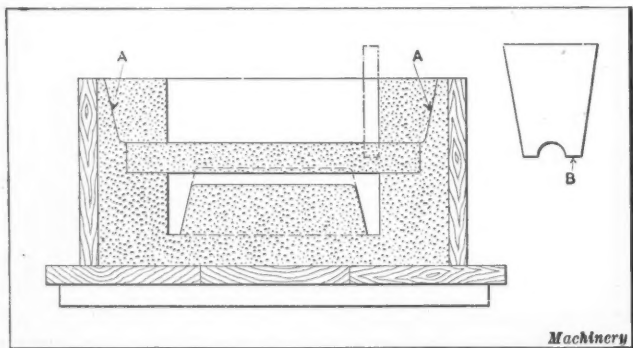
Method in which Casting could have been molded in the Drag without Special Ram-up Cores
